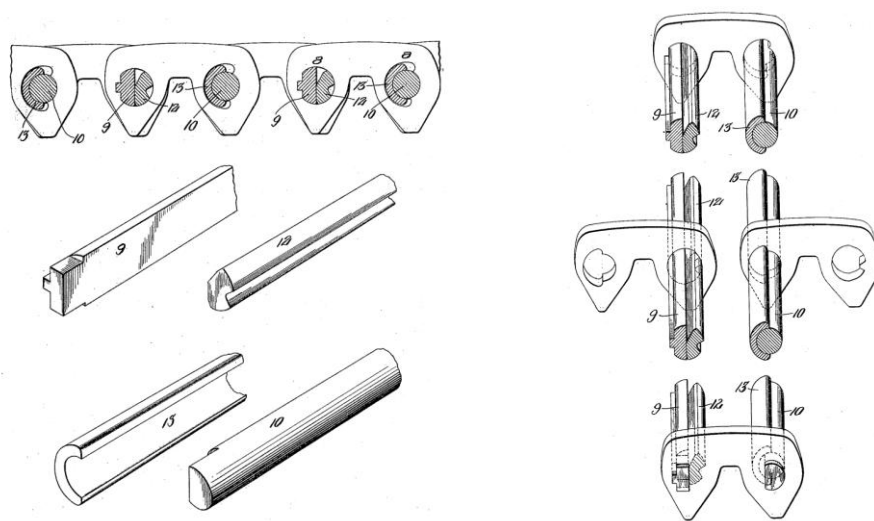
Alternatively arrangement of friction and antifriction joints [2]
